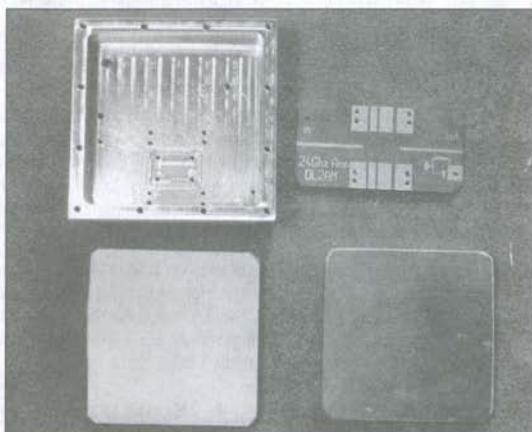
Casing, PCB, silicone rubber and aluminium plates
